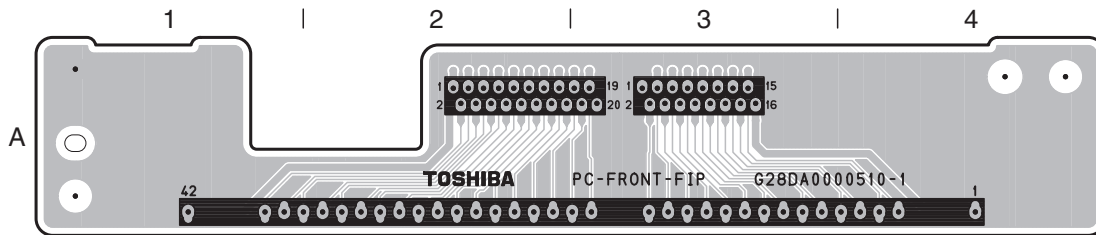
Front FIP PC Board (Bottom side)
